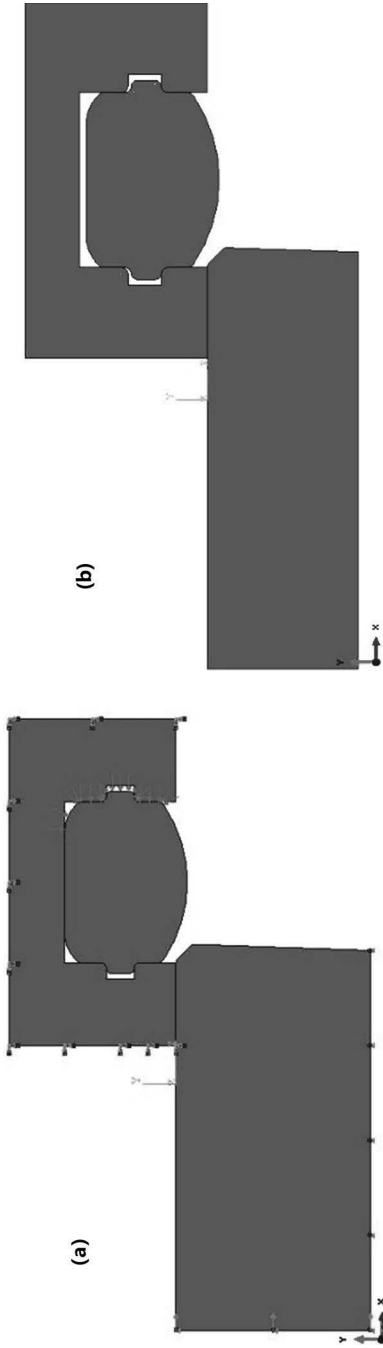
A two-dimensional model of the seal structure of the shear ram BOP.
